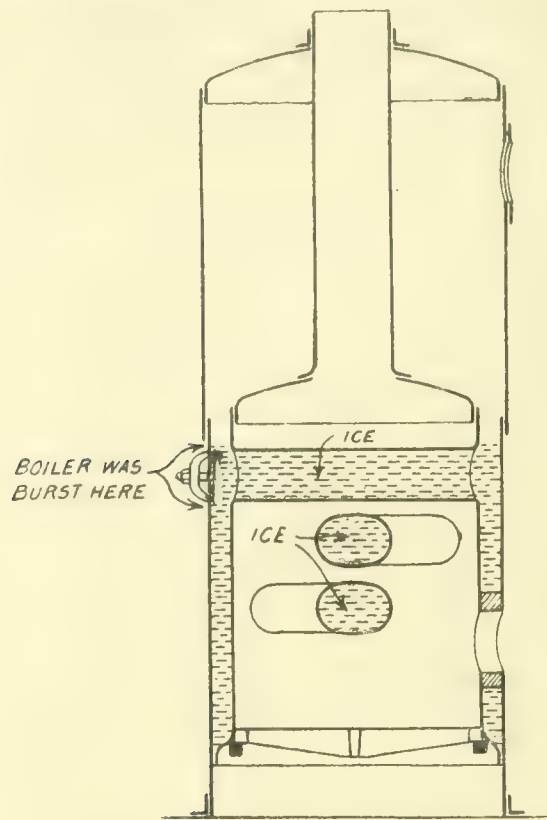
SECTIONAL VIEW OF BOILER BURST BY ICE.
